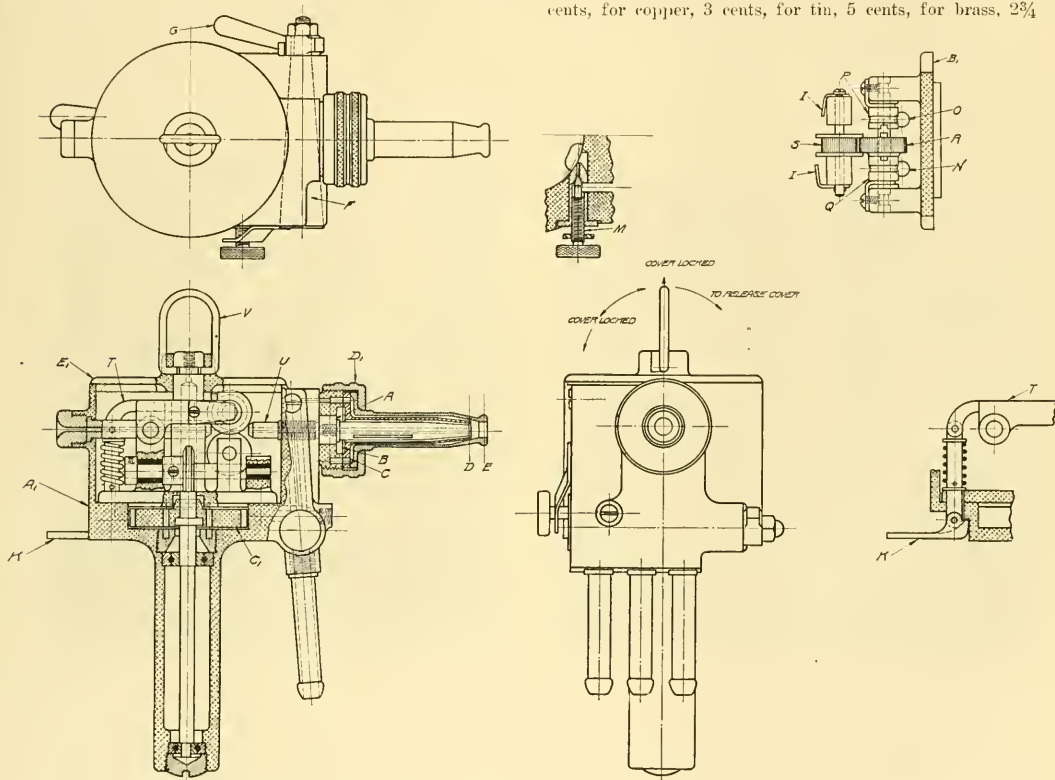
DETAILS OF THE COMMERCIAL METAL SPRAYING PISTOL NOW IN USE, SHOWING TURBINE, WIRE FEED MECHANISM, ETC.
